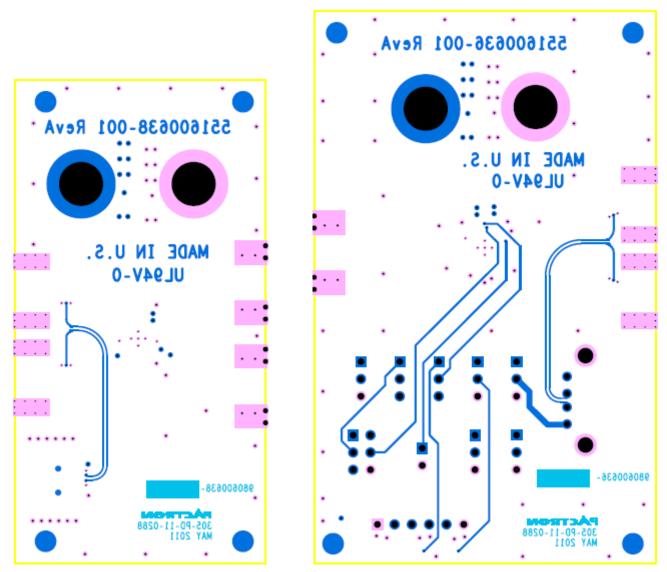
BOTTOM Layer for DRIVECABLE04-TX (*left*) and DRIVECABLE04-RX (*right*)
